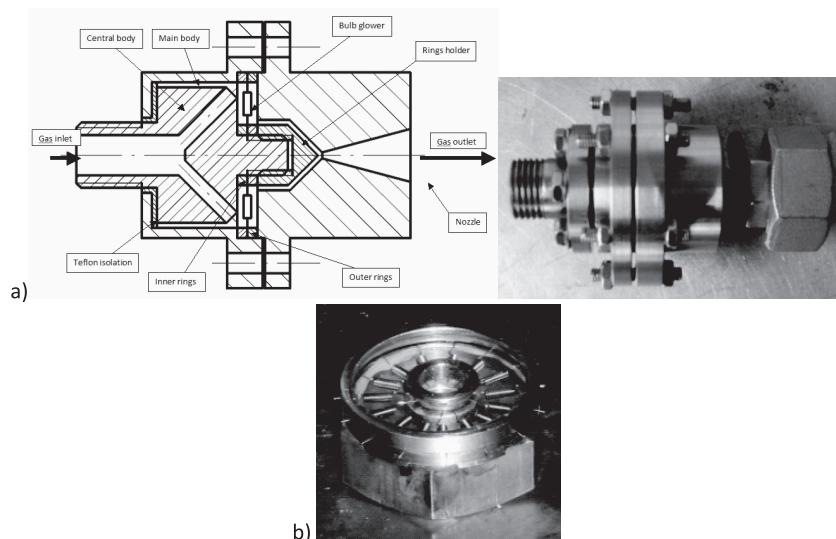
Model of the resistojet with a heater based on bulb glowers: a) technical drawing and model, b) used heater
